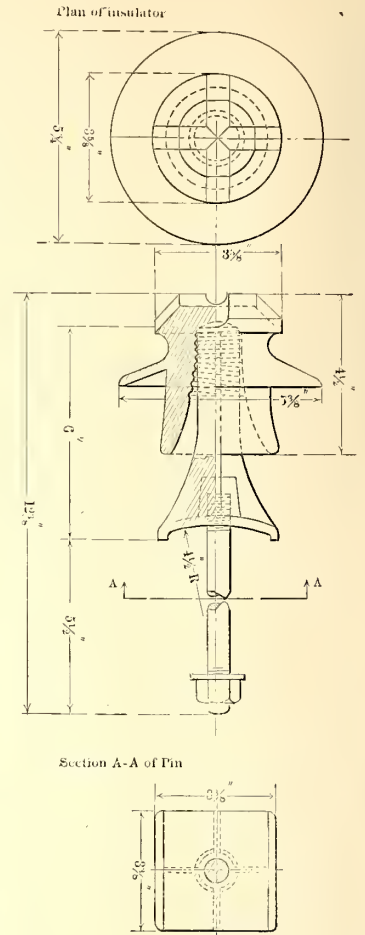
PLAN, HALF ELEVATION AND HALF SECTION OF INSULATOR
